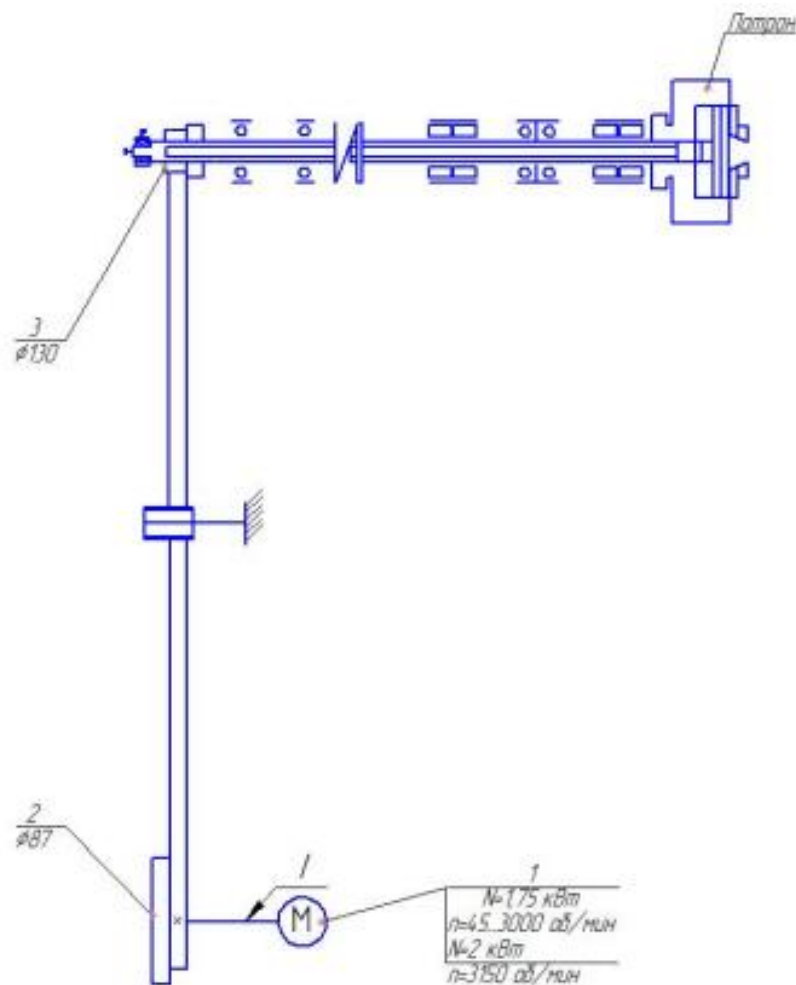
Scheme of the spindle unit with the main motion drive of the TPK125VN2 machine.
